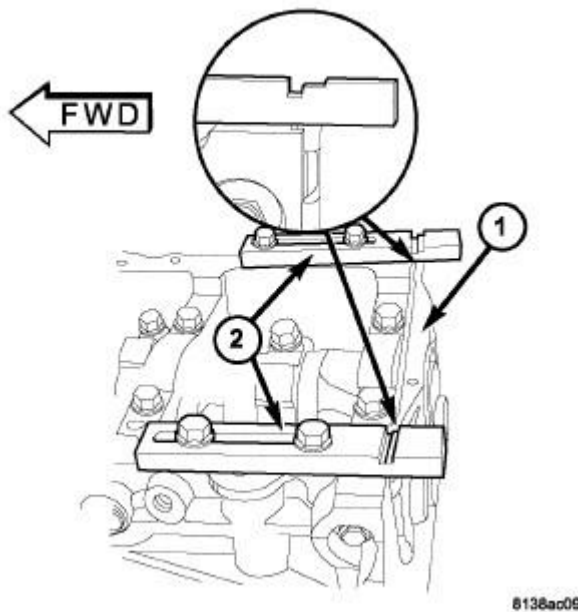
REAR CRANKSHAFT SEAL RETAINER ALIGNMENT
